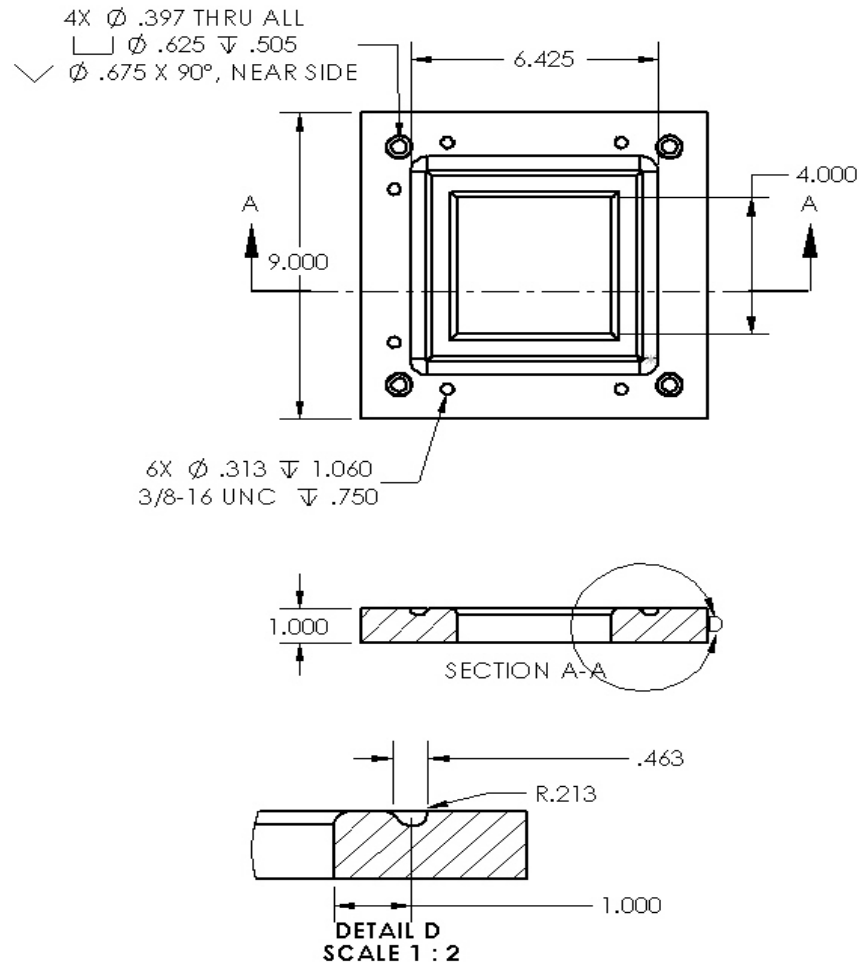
Details of bottom plate of new UHMWPE test fixture
